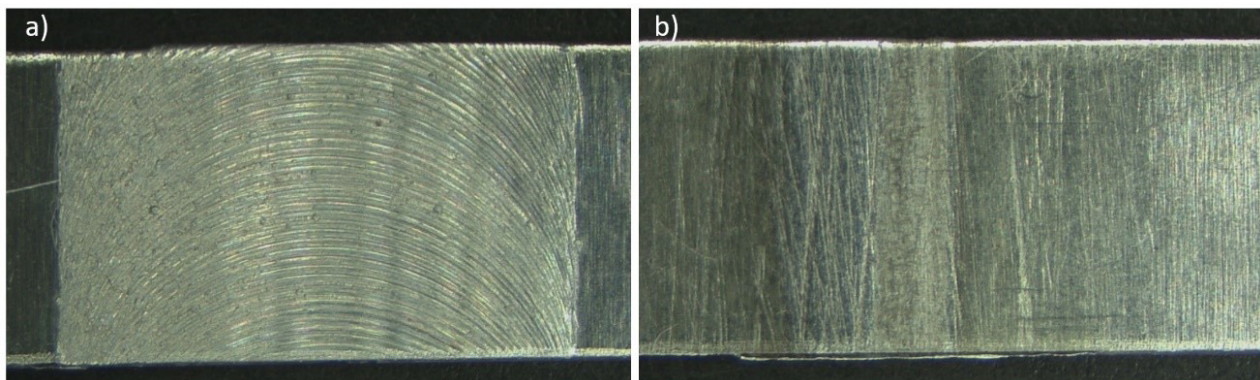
Close-up weld view from: face (a) and ridge (b) side
